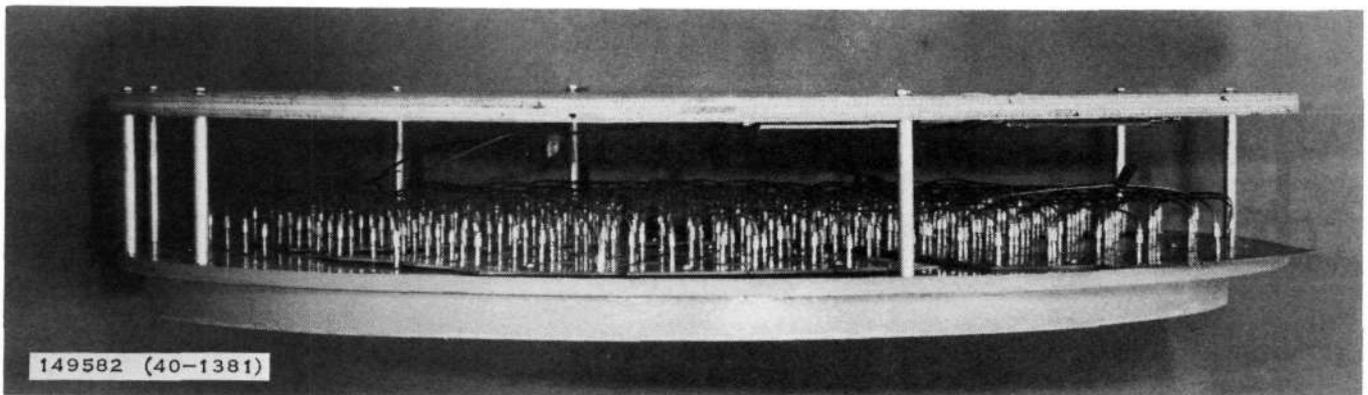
Transmit Manifold and Interconnecting Cables, Side View
